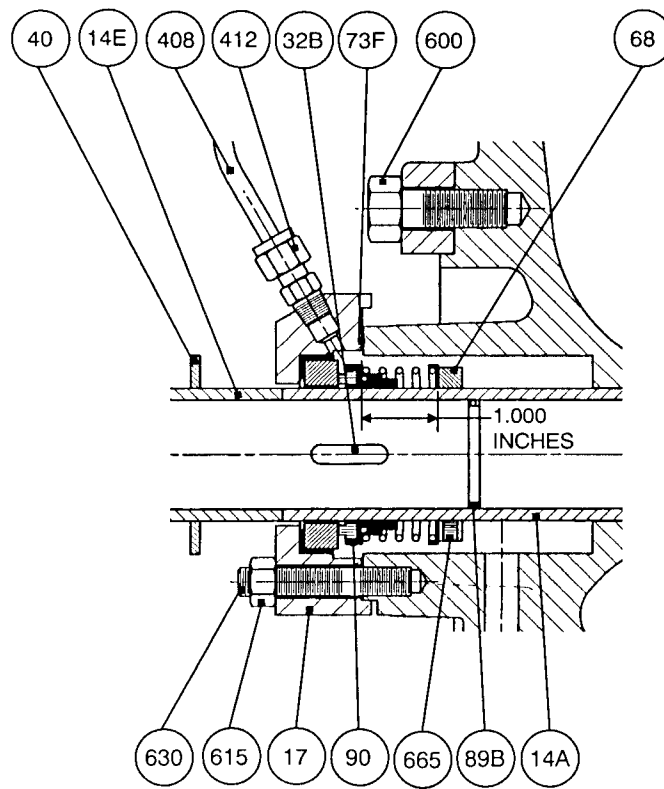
A. Mechanical Seal, WKM-50 and WKM-65 Standard Design
